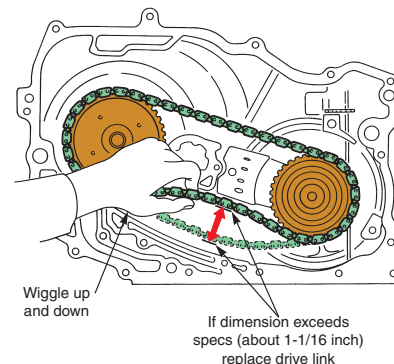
Always check the drive chain for wear before disassembly. To disassemble, remove any snap rings that may be holding the sprockets to their shafts. Position the chain tensioner away from the chain. Then remove the chain and sprockets as an assembly by carefully sliding both sprockets off the transaxle shafts. Save any thrust washers placed between the cover and the sprockets. (DaimlerChrysler)
